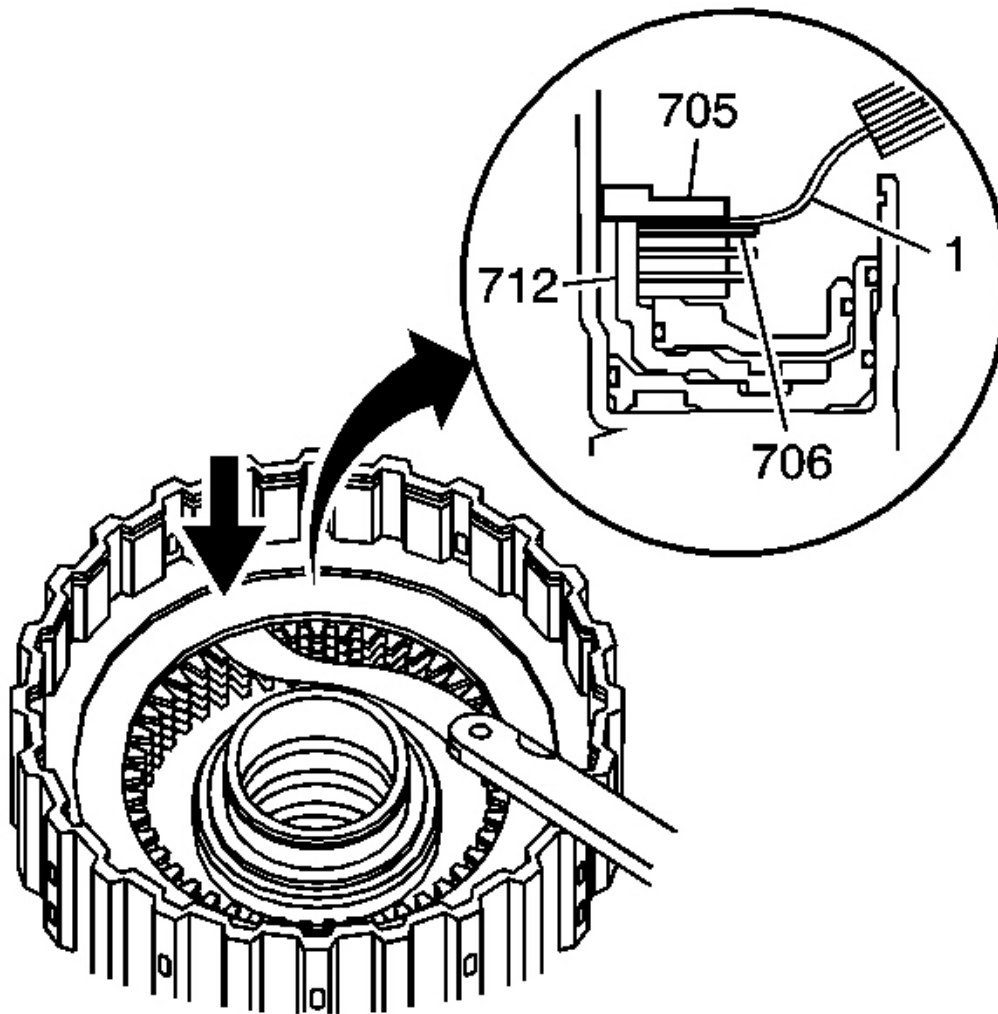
Measuring The Coast Clutch Clearance Between The Coast Clutch Backing Plate & The Top Coast Clutch Fiber Plate Using A Feeler Gage
